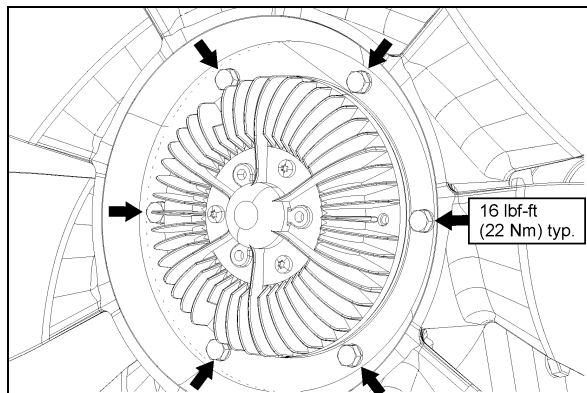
RADIATOR FAN MOUNTING BOLTS
